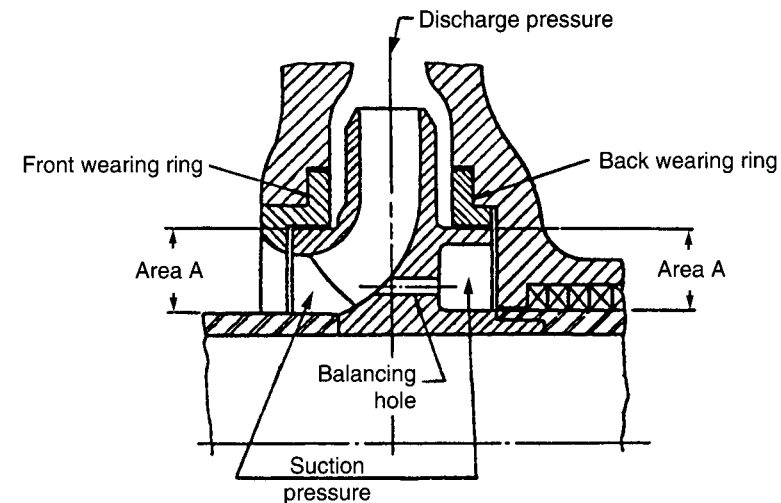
Centrifugal-pump back wearing ring and impeller with balancing holes. Courtesy Ingersoll-Dresser Pump Company.
